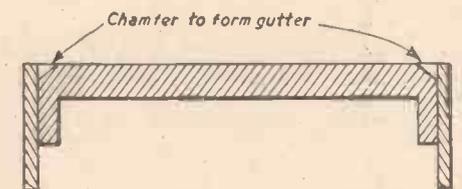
By slightly chamfering the end cap of a boiler the silver solder, when melted, will flow where it is wanted.
